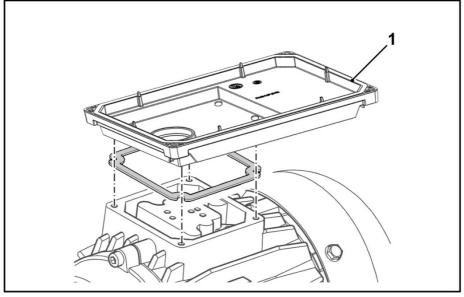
Assembly sequence: Connection box - adapter plate (size)
